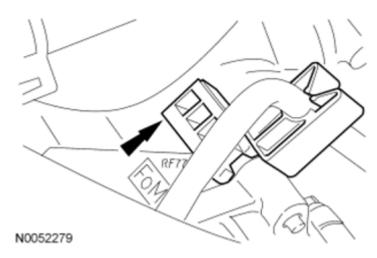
Locating Engine Wiring Harness Electrical Connectors Courtesy of FORD MOTOR CO.
